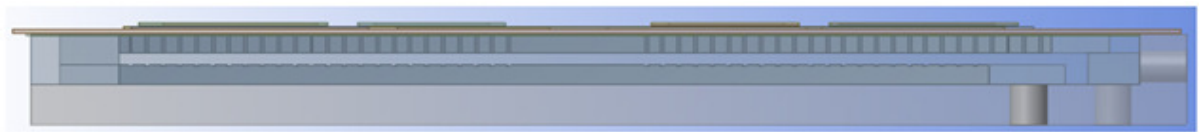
Assembled power module – ribbed mini-channel cooler test sample.
